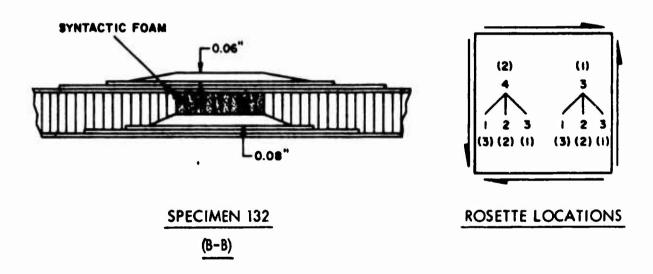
Shear Beam Specimen Geometry Common to Specimens 131 and 132.
